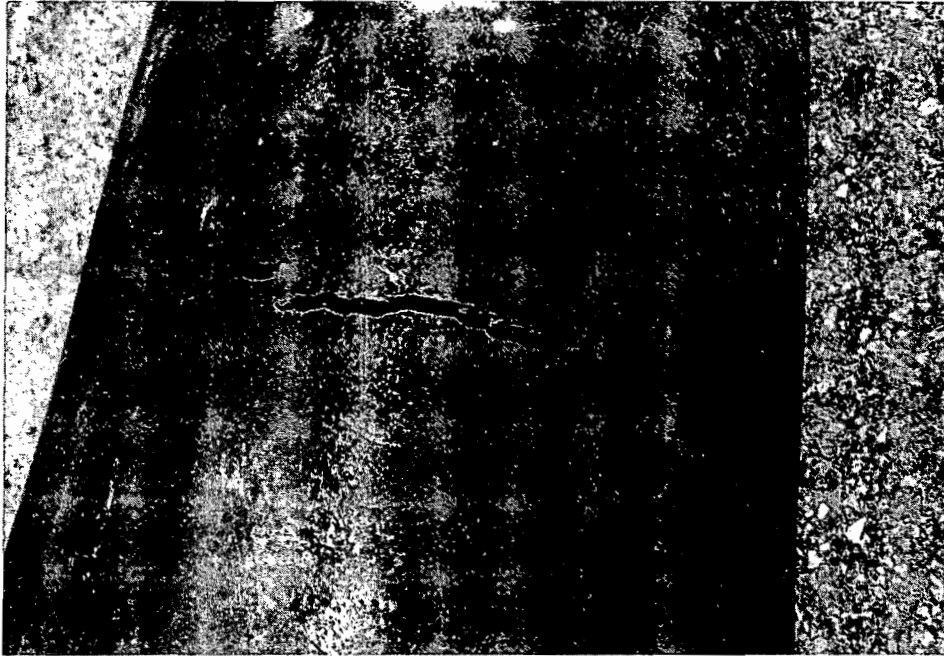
Ten-inch-long crack in 12 3/4-inch outside diameter, bare steel pipe.
